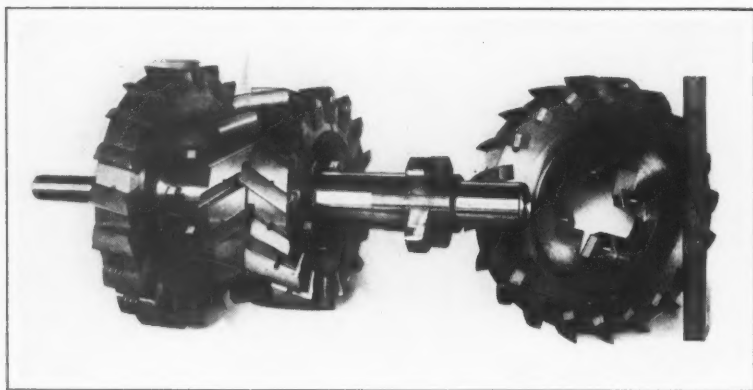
Milling Cutters and Arbor Constructed for Performing a Heavy Operation on a Comparatively Light Machine
